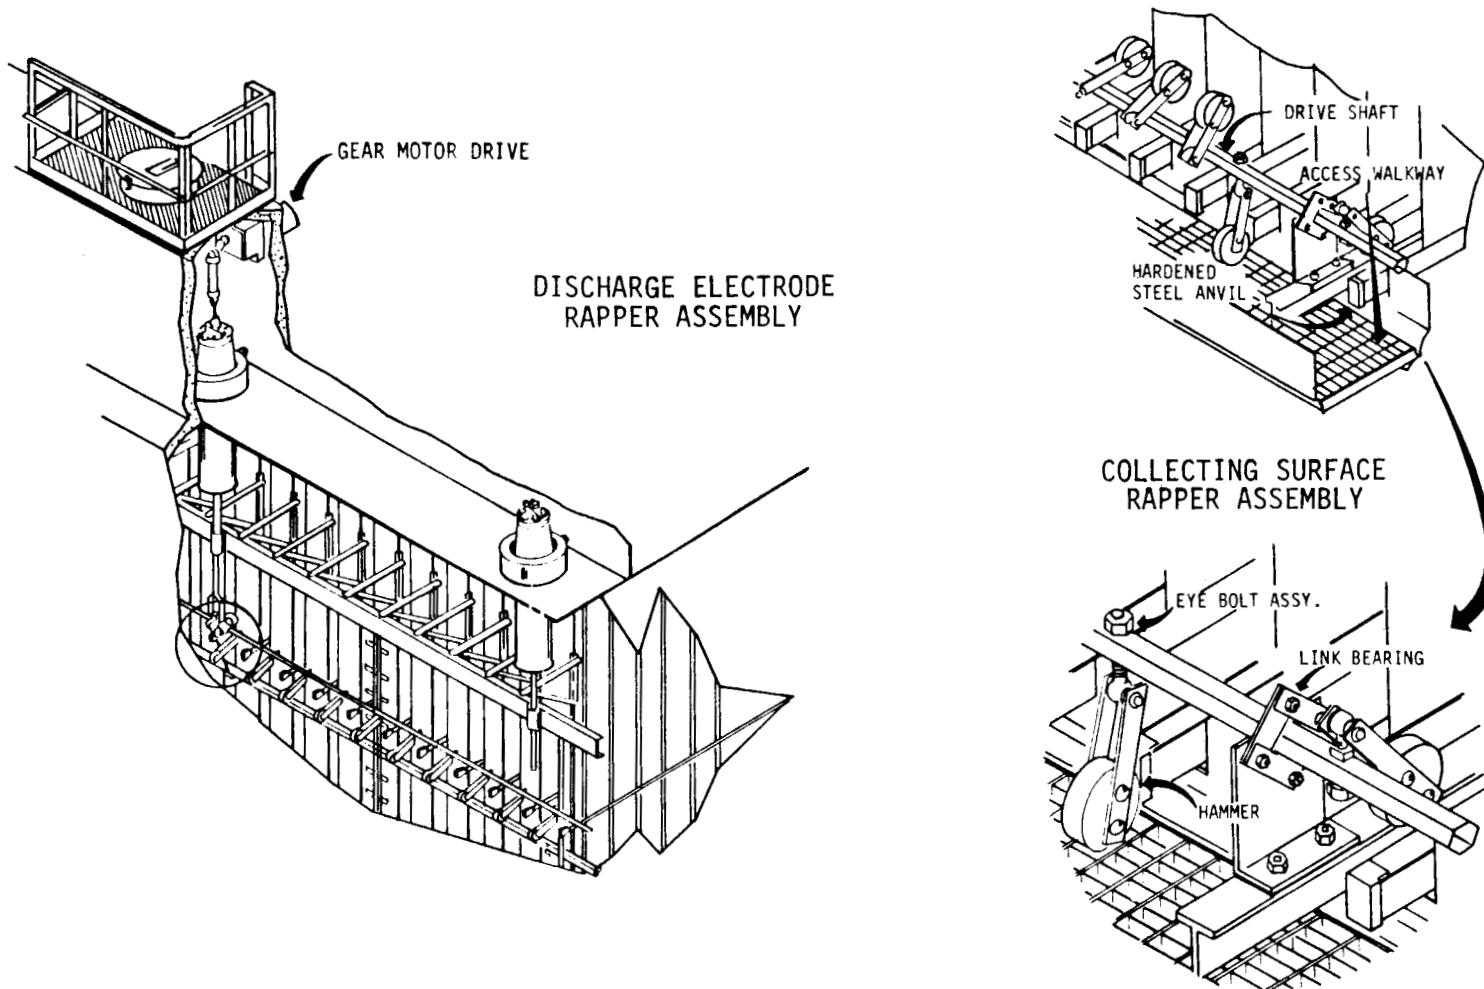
Tumbling-hammer assembly for use with rigid-frame discharge electrode and collecting-surface rapping system. (Courtesy of Wheelabrator Frye, Inc.)
